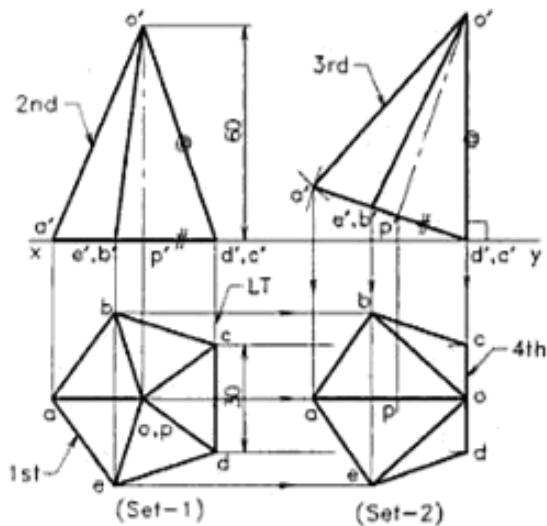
Pentagonal pyramid (slant surface perpendicular to HP).
